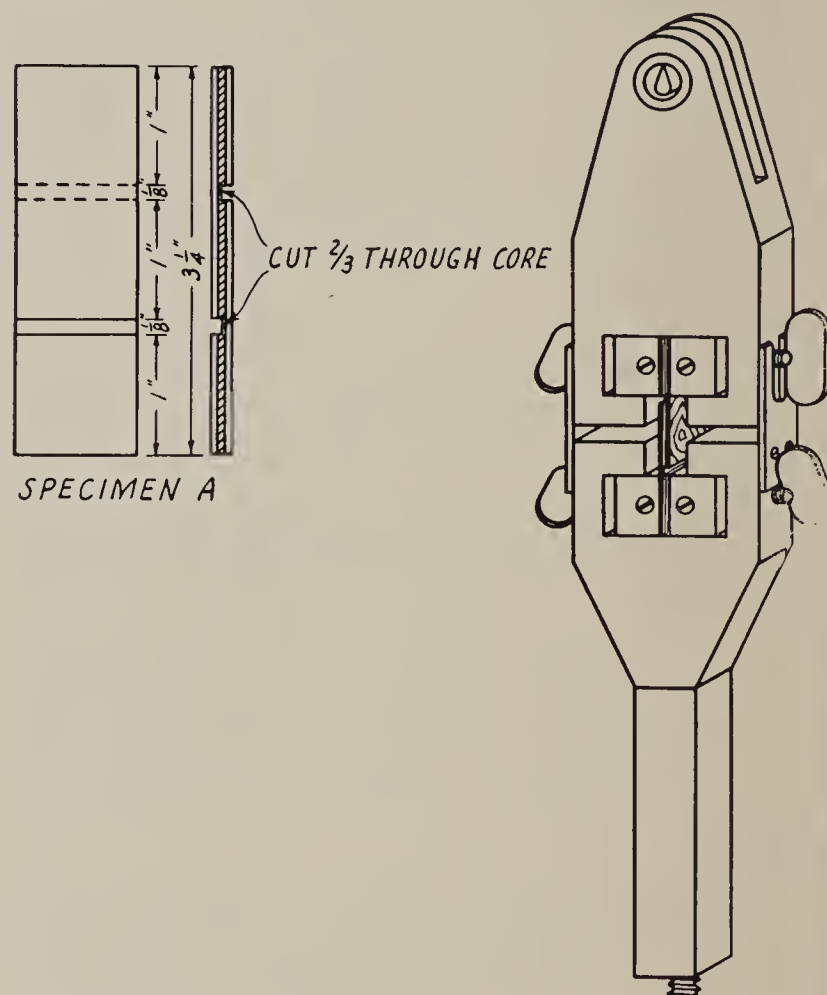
Testing machine (right) and properly notched plywood shear-test specimen and grips (left) used for testing glue-joint quality in plywood. Machine registers joint strength in pounds per square inch of glue-joint area tested.
